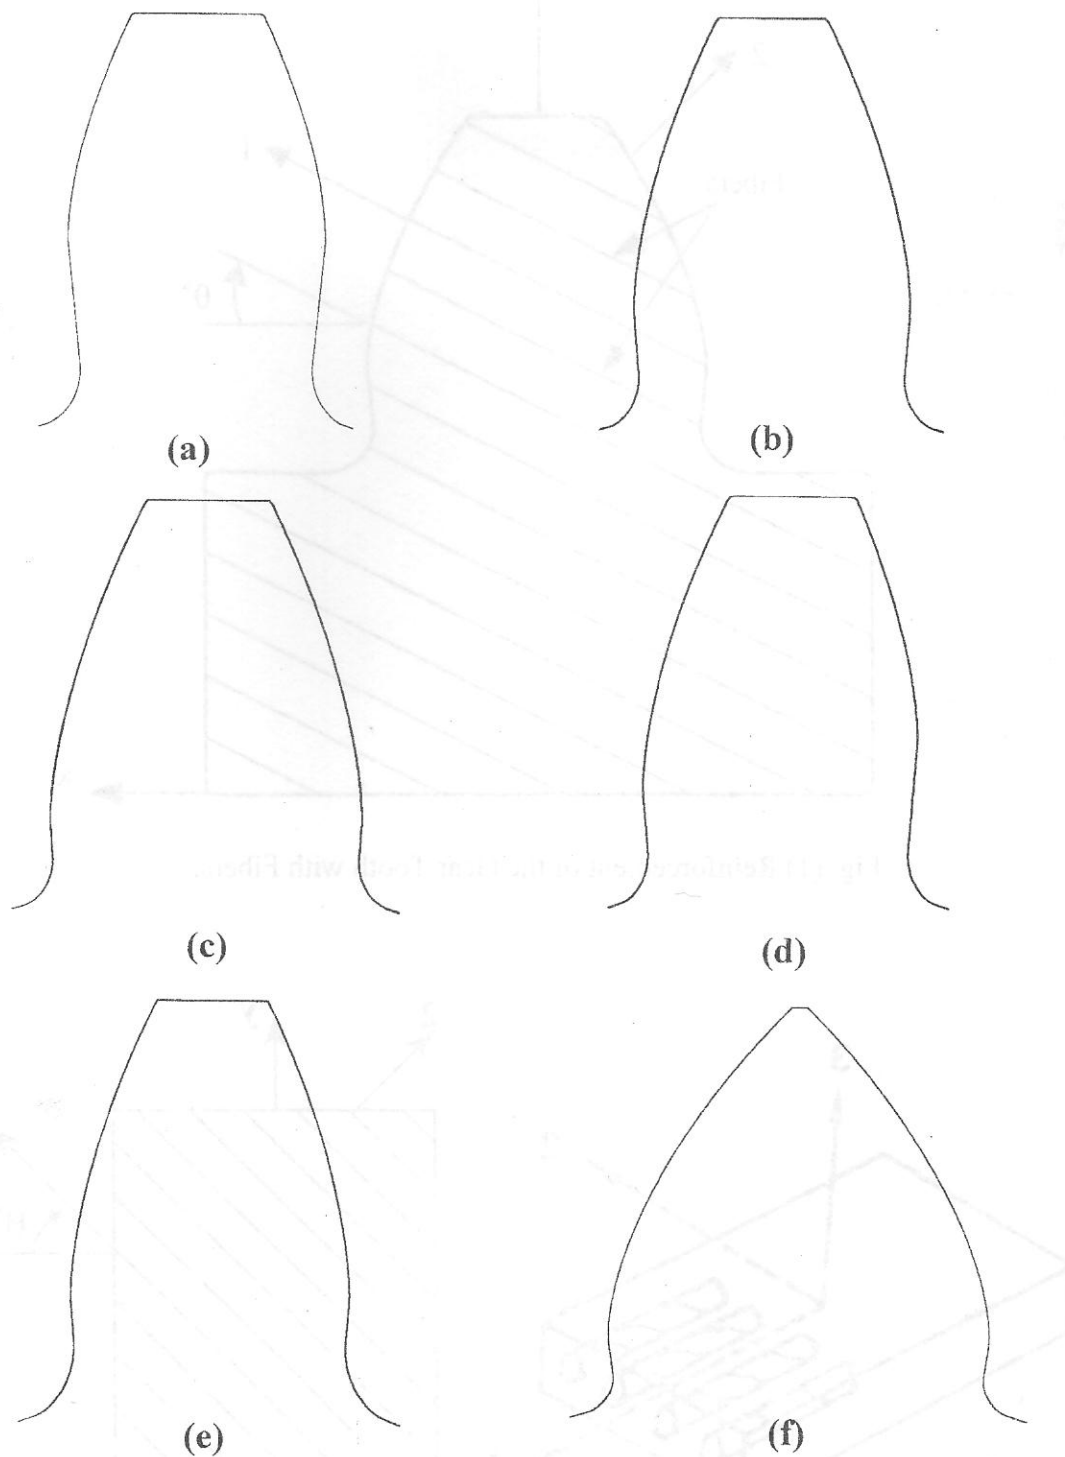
Samples of Gear Tooth Profiles of module  $m_o = 10$  mm.
